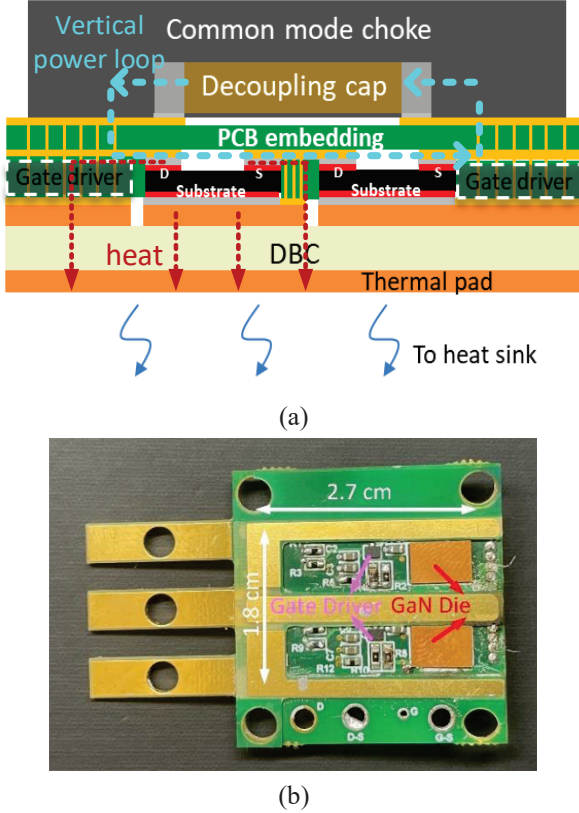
(a) Illustration of the layers and components at the cross-section of the power module with double-sided cooling, decoupling capacitors, CM choke, and gate driver; (b) bottom view of the PCB showing gate drivers and GaN dies in the embedding layer without DBC attached.
